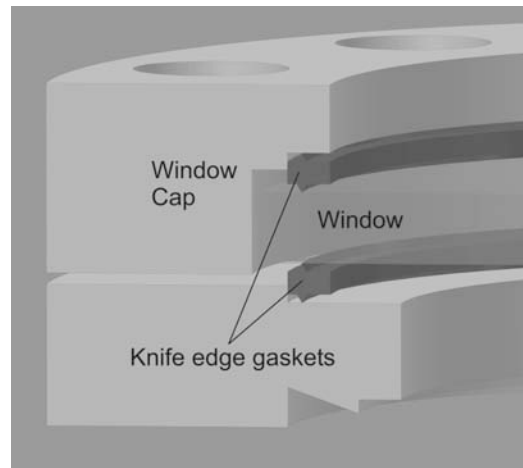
Cross section of a mechanically sealed window design. The vacuum seal is created by crushing the knife edges on the copper gaskets
